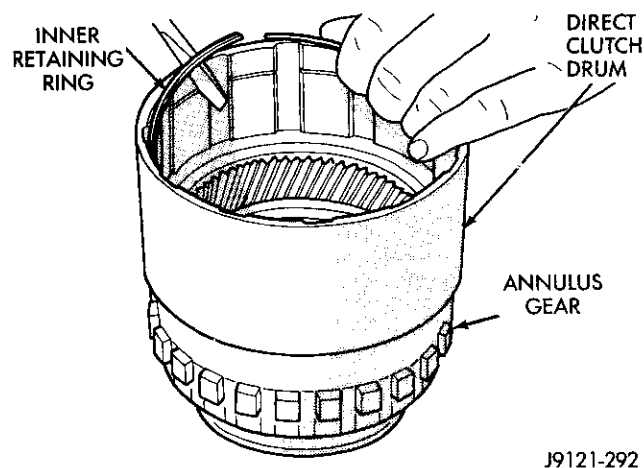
Removing Clutch Drum Inner Retaining Ring
